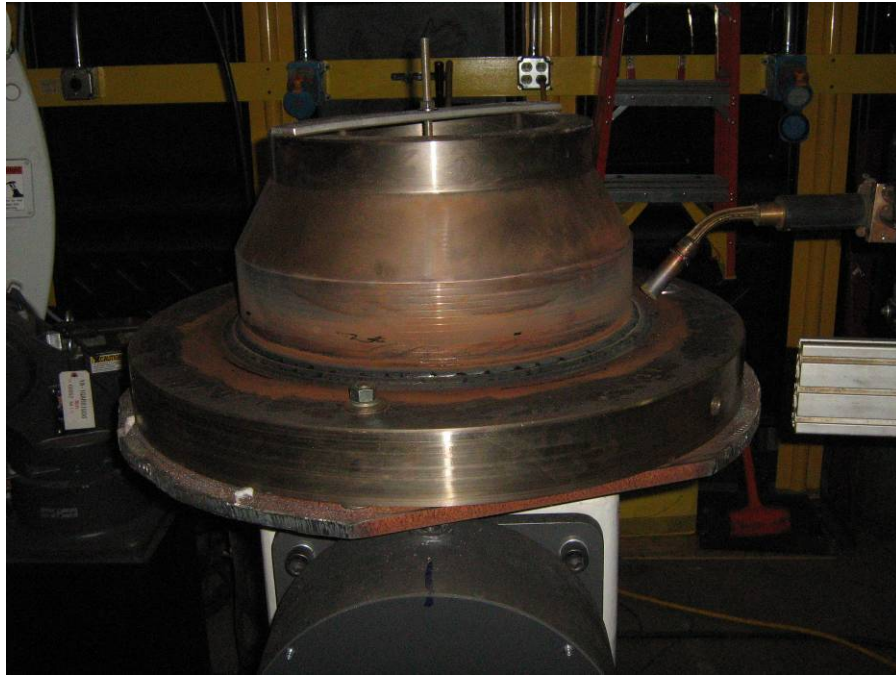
Welding of the Stiffener Plate on the WOM
